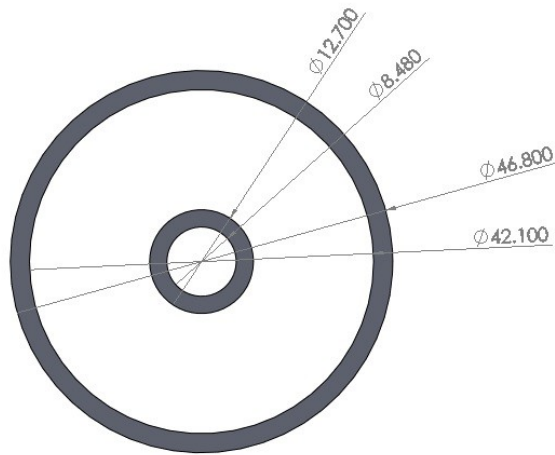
Overview dimensions of double pipe heat exchanger.
